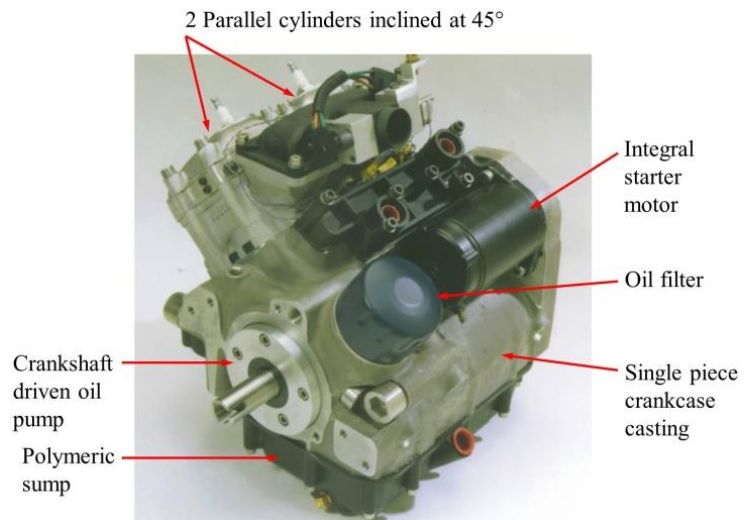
UMA290 290 cm³ twin cylinder stepped piston engine.
